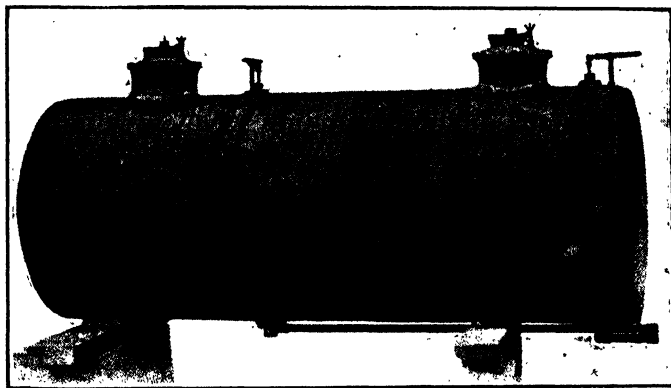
WELDED PETROL TANK FOR ROAD MOTOR TANK WAGON, CAPACITY, 1,000 GALLONS.
